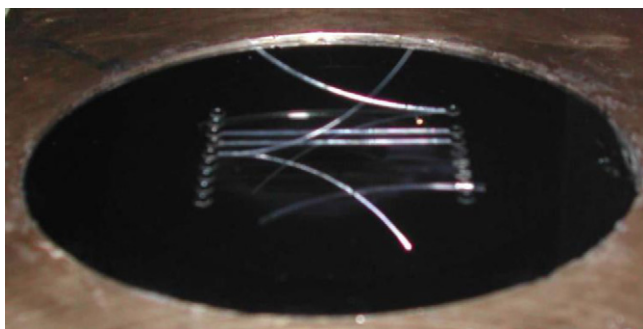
Picture of the SU-8/Si mould insert with ridges of 30 mm length and 100 μm width and height destroyed after demoulding.
